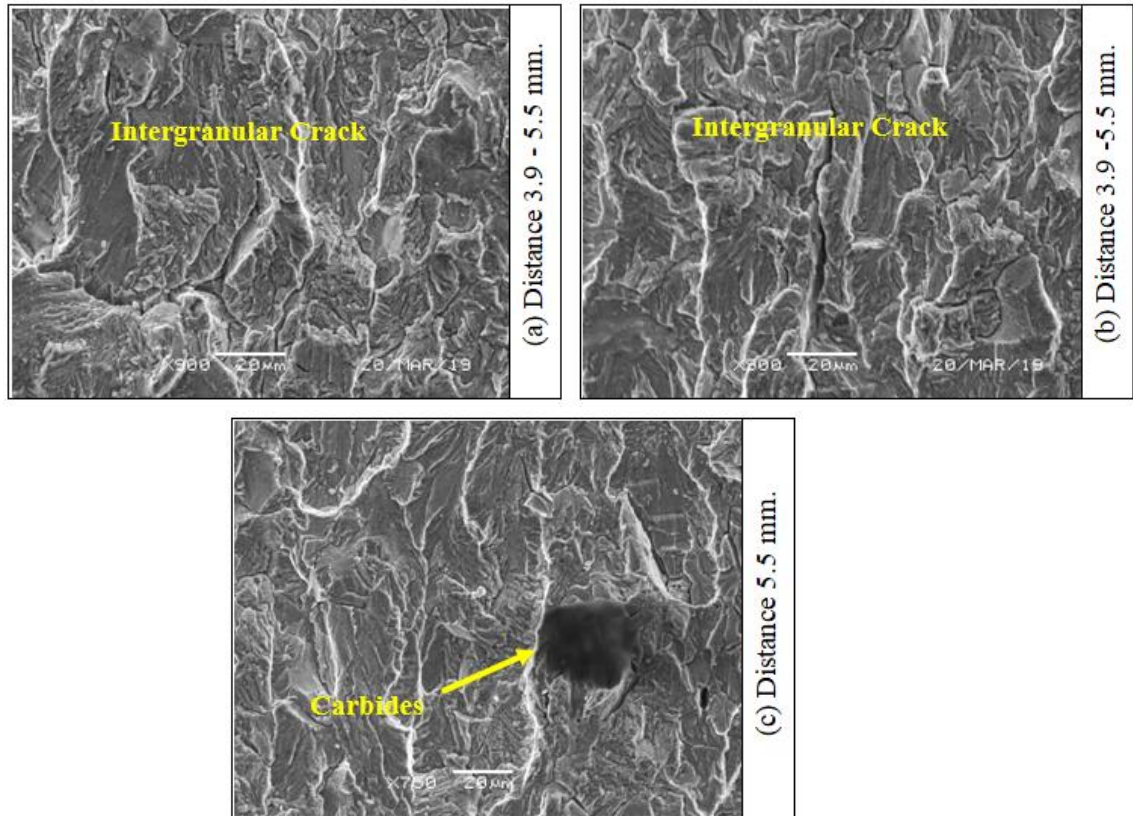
SEM Micrographs showing the fracture surface (a)(b) Intergranular crack at approximately 3.9-5.5 mm crack length, and (c) Iron carbide at a distance of 5.5 mm.
